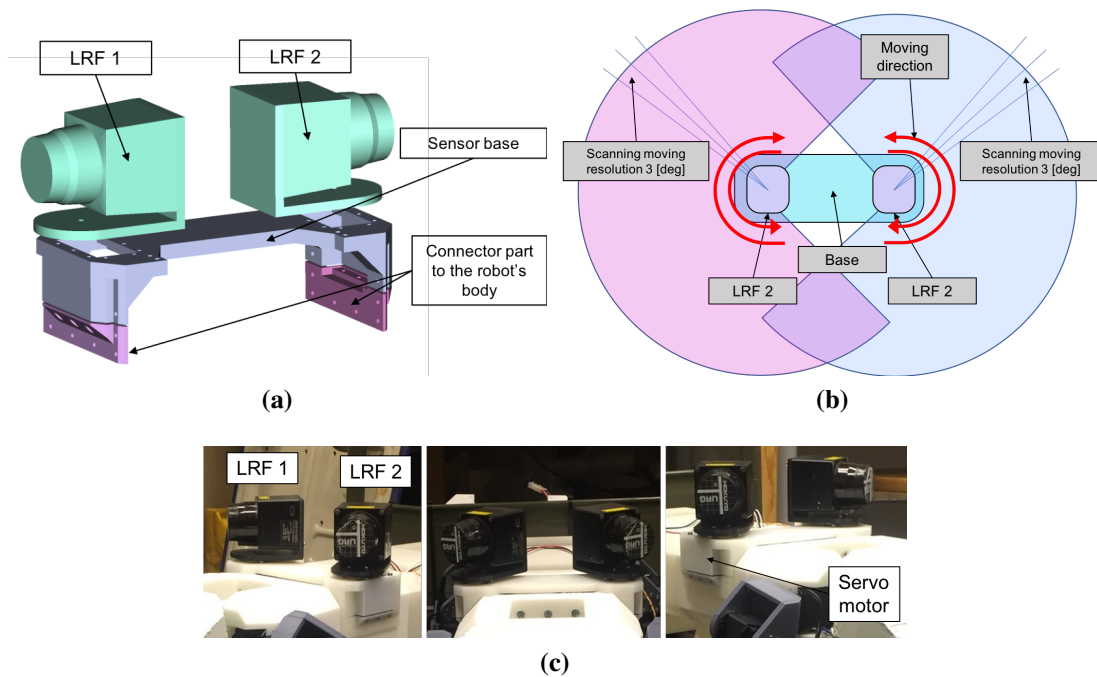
Design of DLRF sensor. (a) CAD design. (b) The structure of the sensor (c) The appearance design of the Dual LRF sensor
